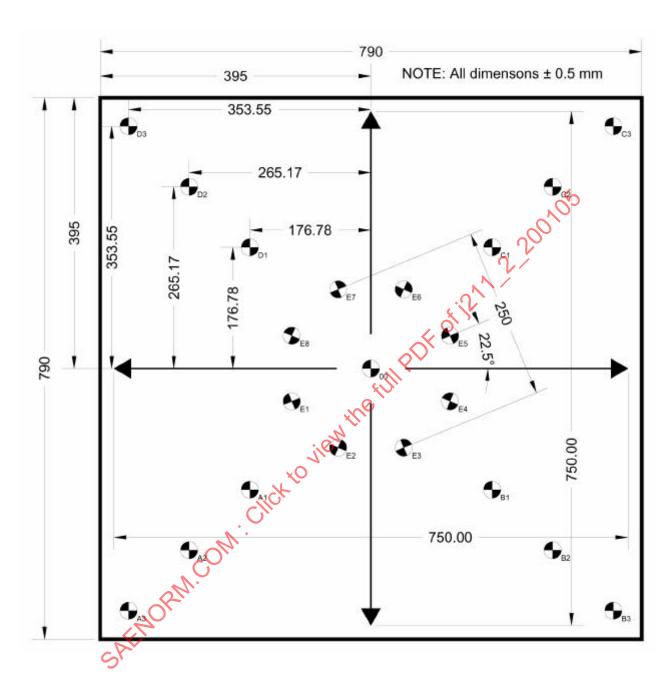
SQUARE TARGET PATTERN DRAWING
